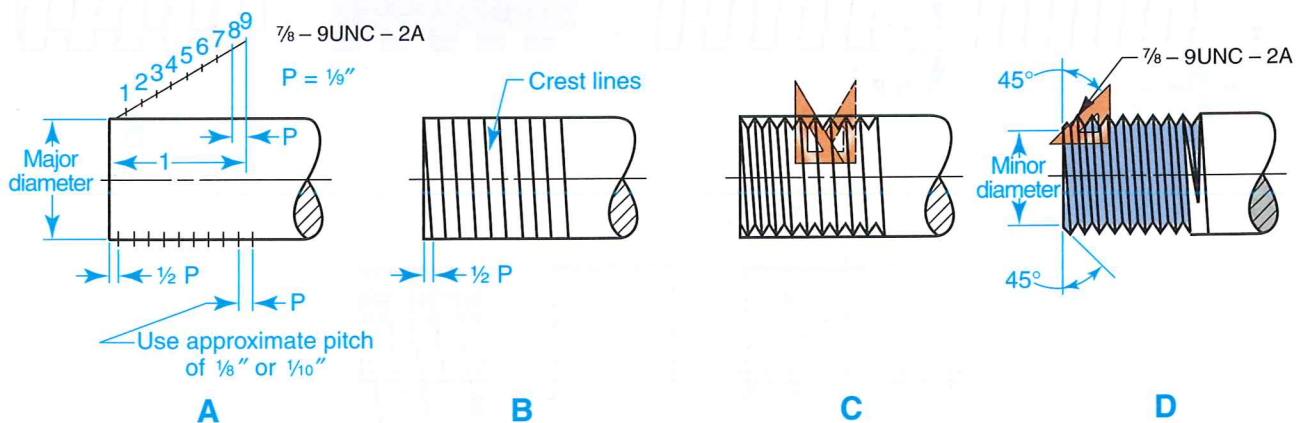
Constructing a detailed representation of the Sharp V thread form.
